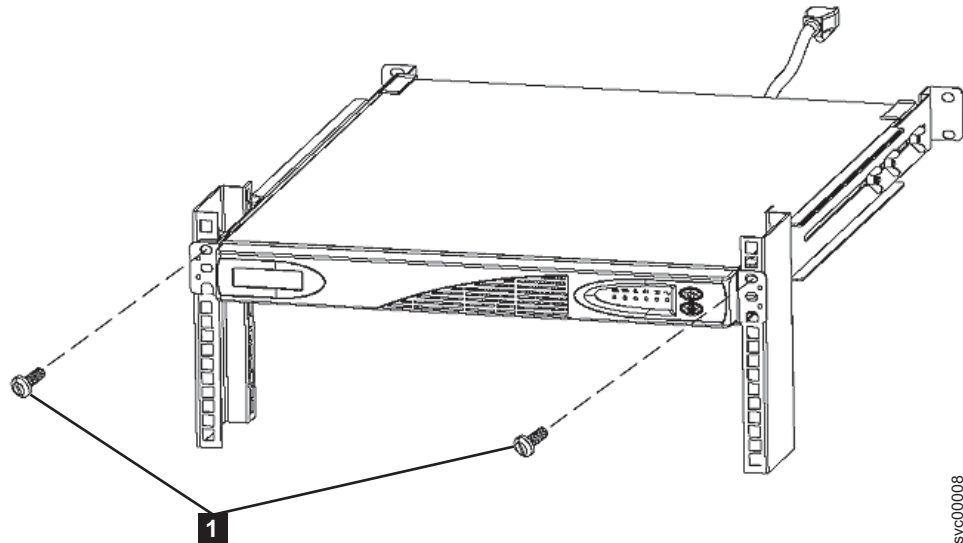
Removing the mounting screws from the 2145-1U uninterruptible power supply
